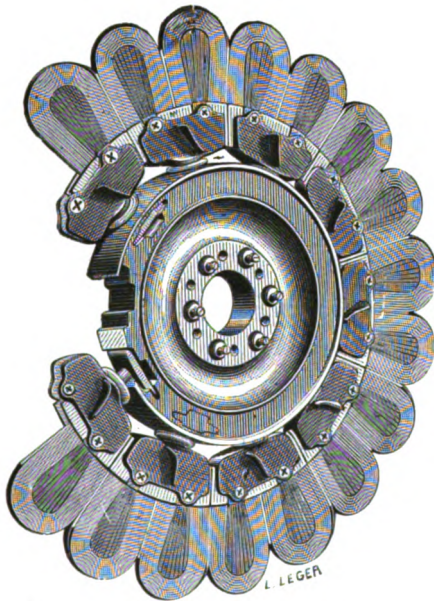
FERRANTI ARMATURE, SHOWING MODE OF MOUNTING COIL-HOLDERS.
